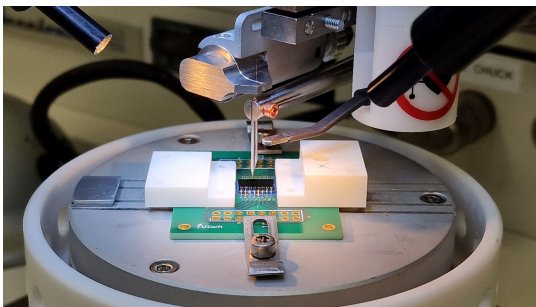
W6R3C06 thruster assembly in the wire bonder.
